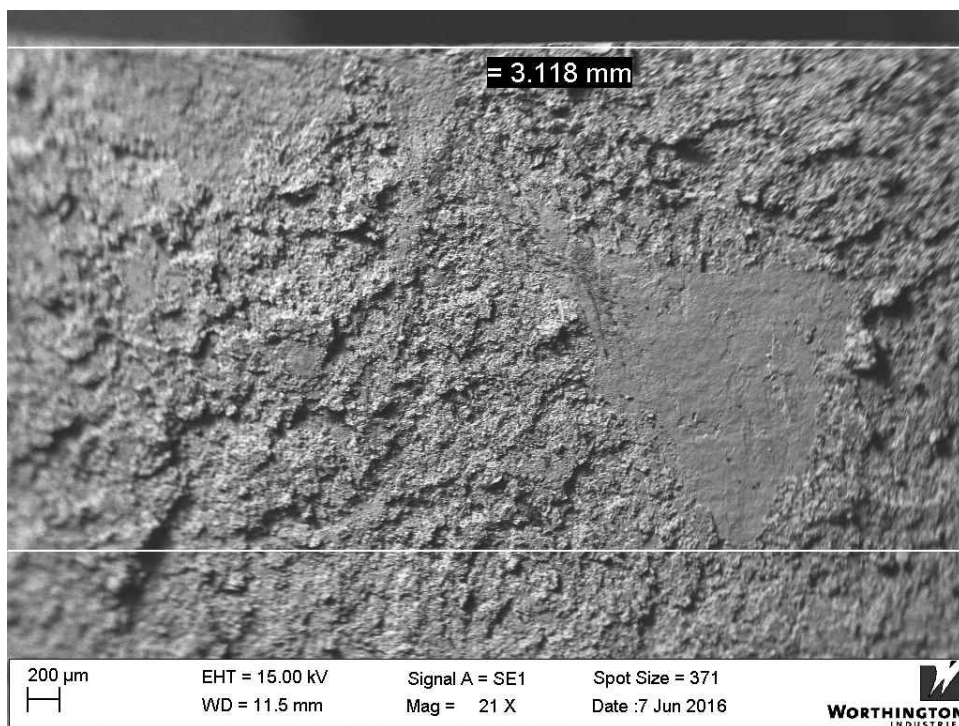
SEM image of non-surface breaking part of cold weld feature; SWA #5-3
